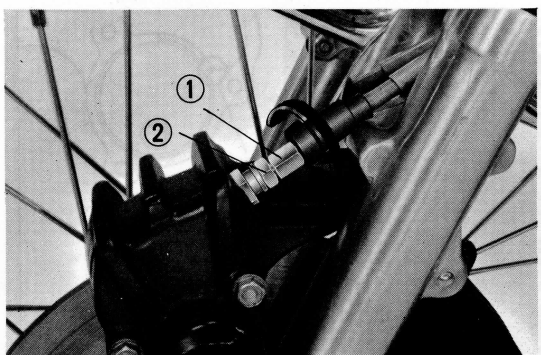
① Brake cable adjusting bolt ② Lock nut
